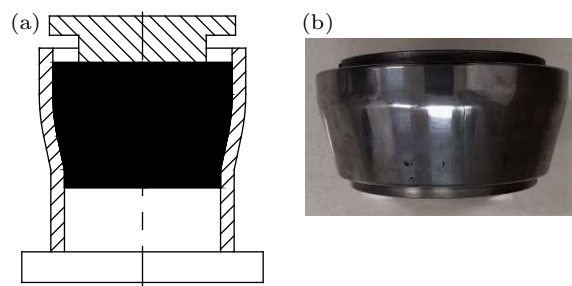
Mechanical expansion specimen sampling: (a) expansion diagram; (b) expansion cone.
